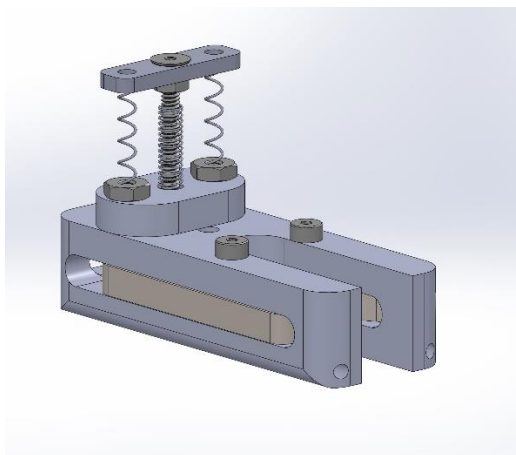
Ball bearing mechanism with 90°C adapter and two 90°C SMA springs.
